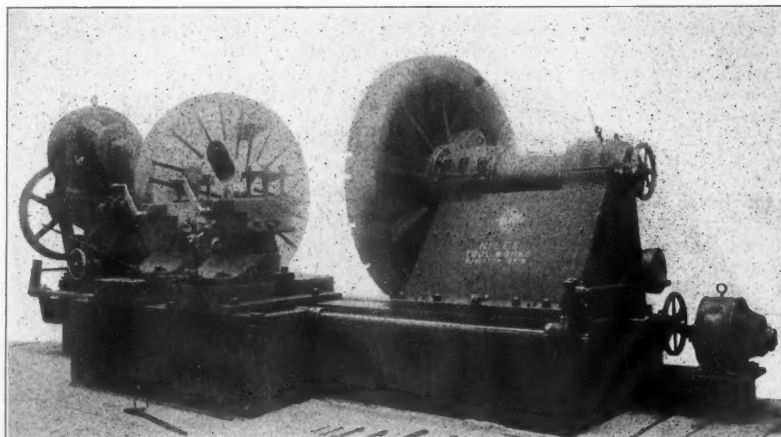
Niles-Bement-Pond 90-in. Wheel Lathe.
